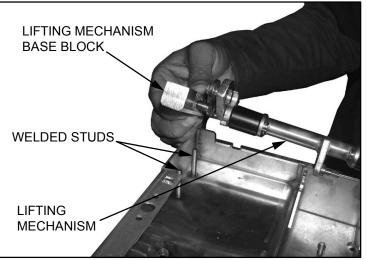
LIFTING MECHANISM INSTALLATION
